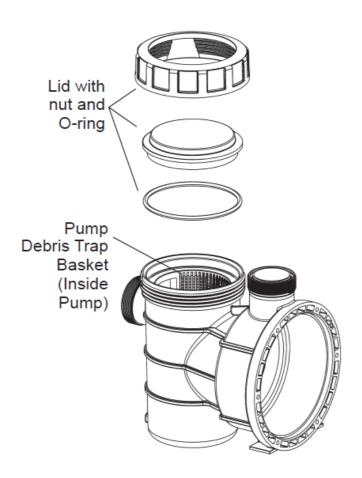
EXPLODED VIEW OF LID ASSEMBLY
